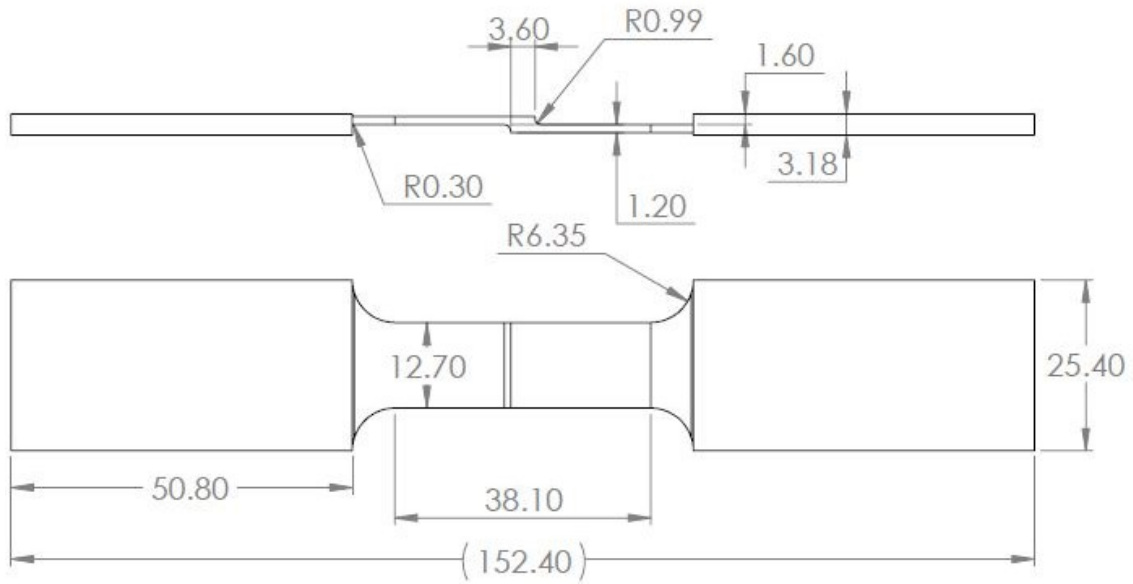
Dimensioned drawing of IN625 monolithic simulated single lap joint specimen. Specimen cut by wire EDM.
